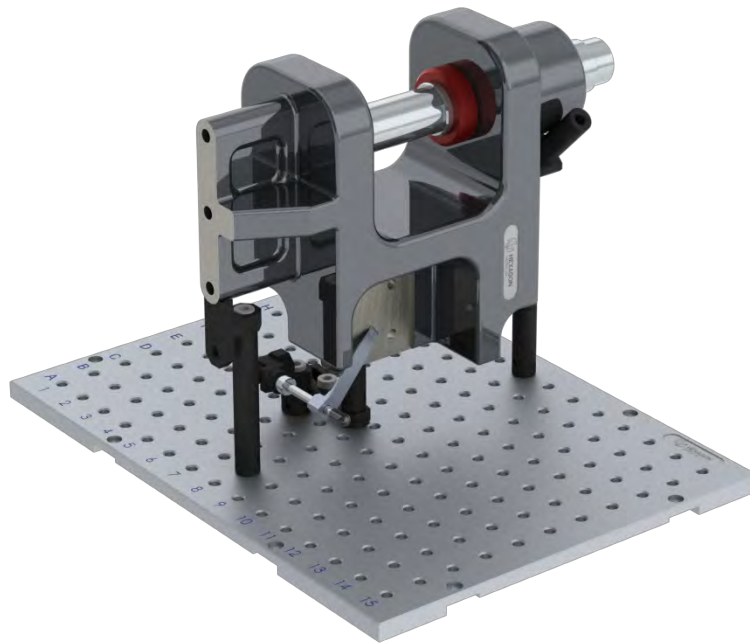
A component held in a workpiece holding kit (courtesy of Hexagon Metrology)
